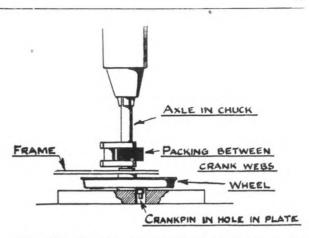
Pressing the left-hand wheel on to the short end of the driving axle in the drilling machine.
